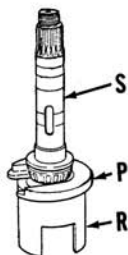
Following procedure given in text, install Yanmar 17099-09030 support plate (P) between output shaft (S) collar and rear bearing. Position 2 Yanmar special tool 17095-09070 (R) as a support and press output shaft out of rear bearing.
